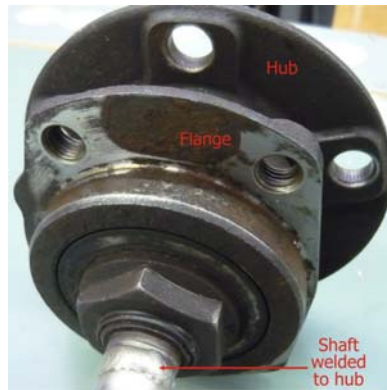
Photo of the hub bearing. The flange connects to rigid frame in the test setup while the hub bearing connects the two rotor disks.
